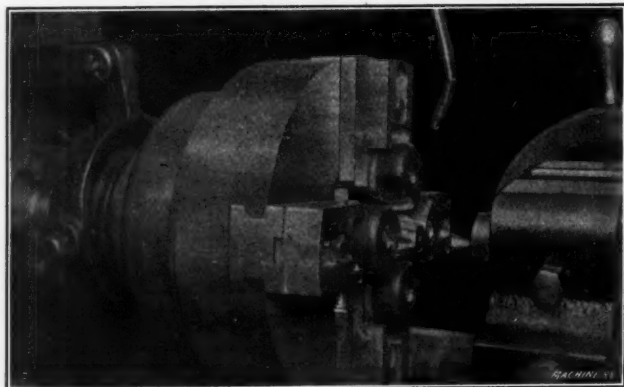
Murchey Pipe Threading Die set up on a Machine
